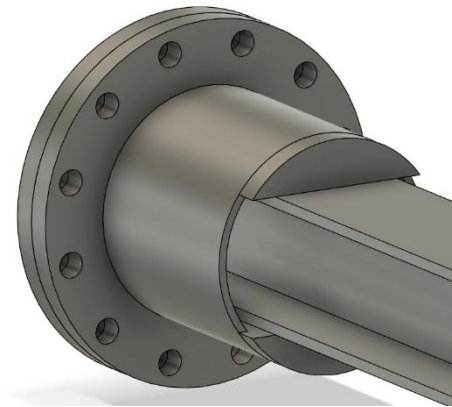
Detail of fixed nozzle support with nozzle wall support pieces.
